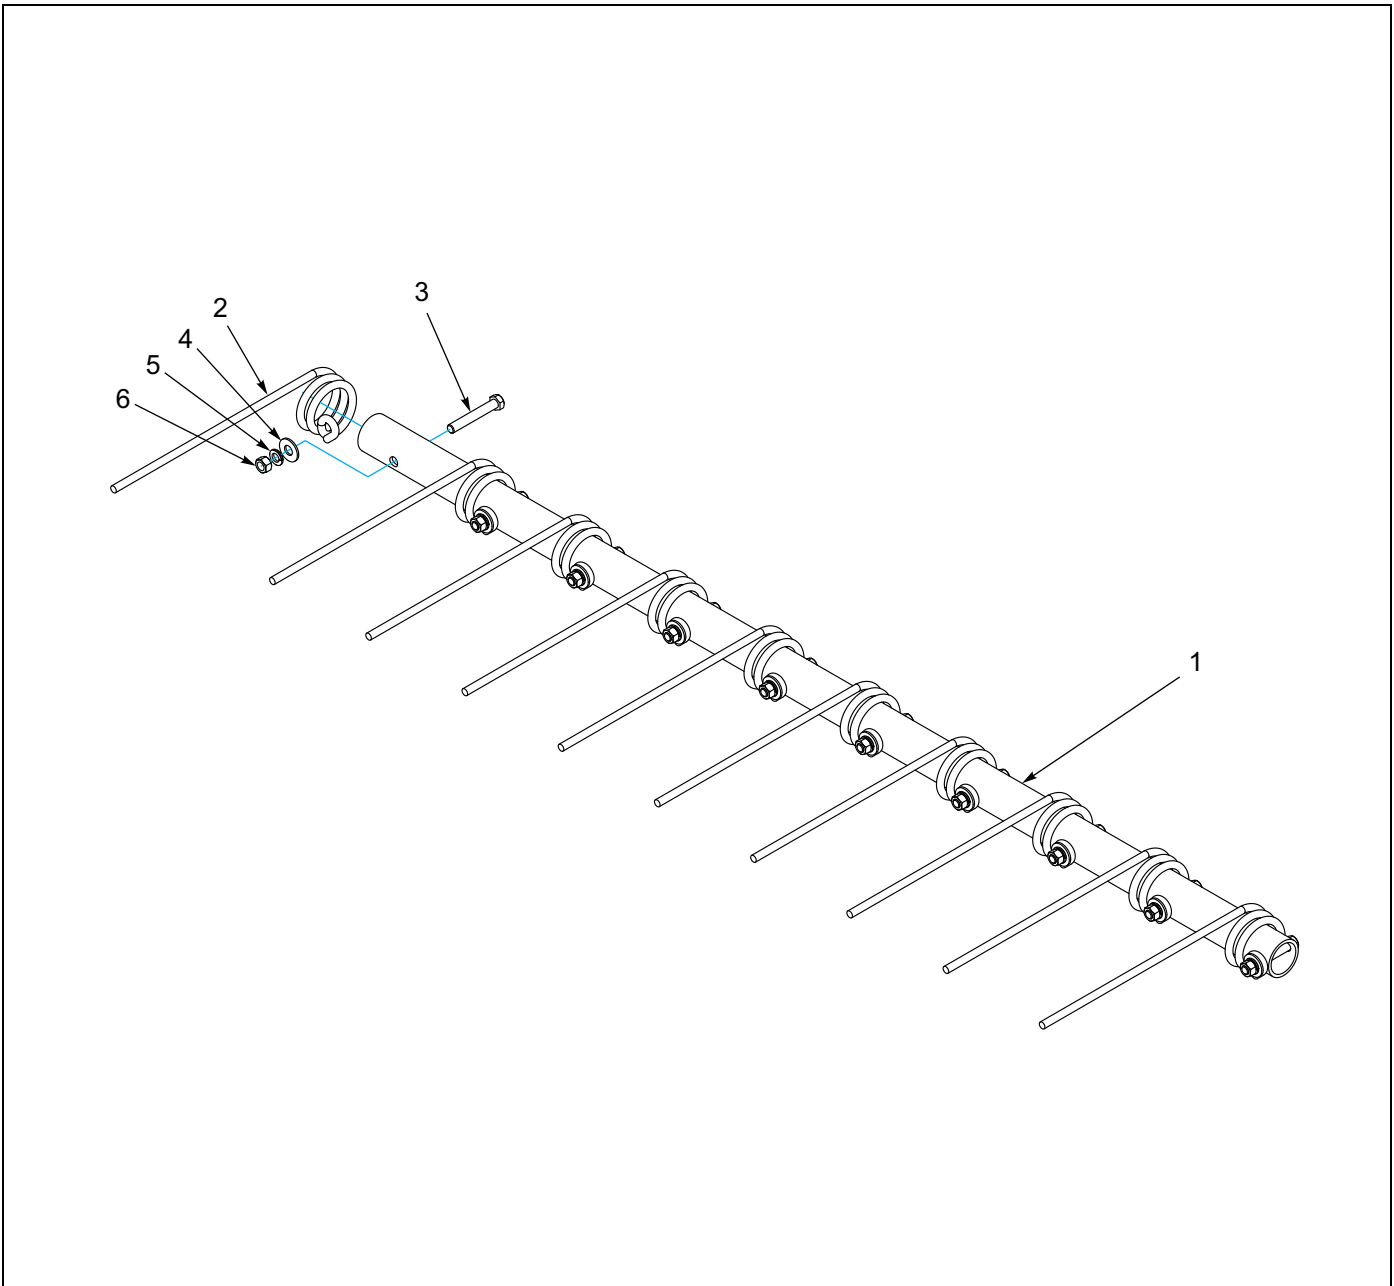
Coil Tine Wheel Track Remover 4' and 5'
